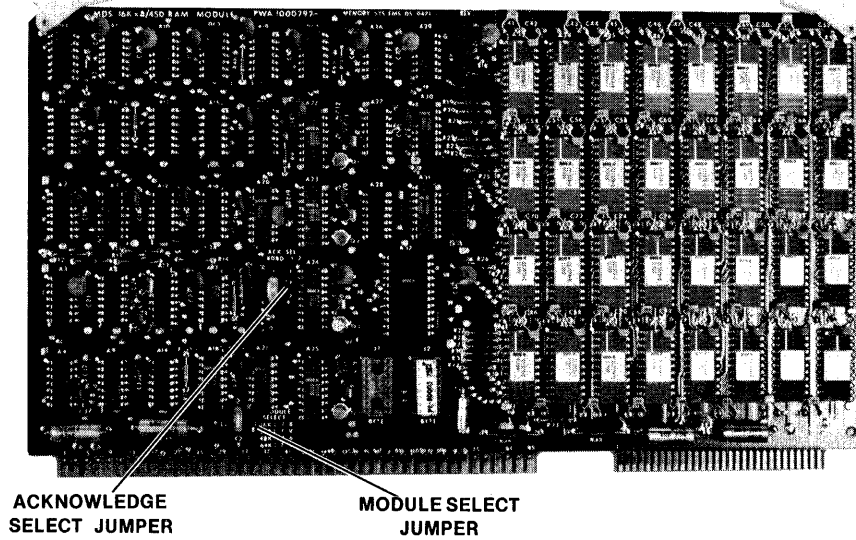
SBC-016 16K RAM Module Jumper Locations
